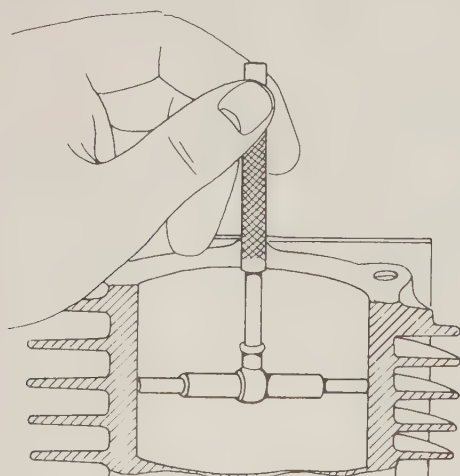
Using a telescoping gauge to measure the diameter of a cylinder bore.
